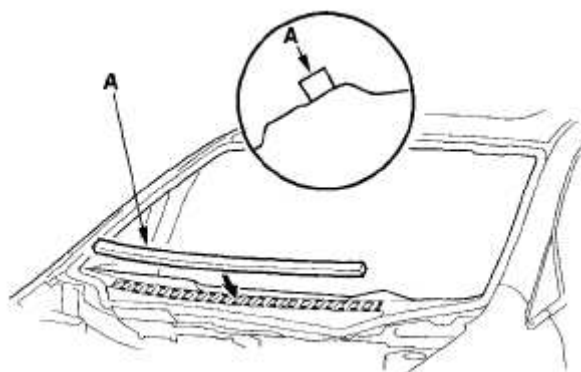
Attaching Lower Rubber Dam With Body Side Adhesive Tape To Body
